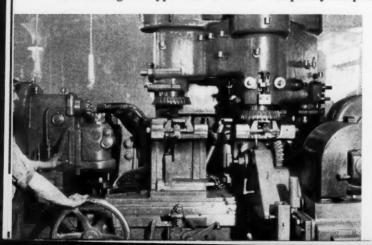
Milling Base of Linotype Composing Machine, Using an Ingersoll Milling Machine of Special Design. Sixteen Cutters are Used.
